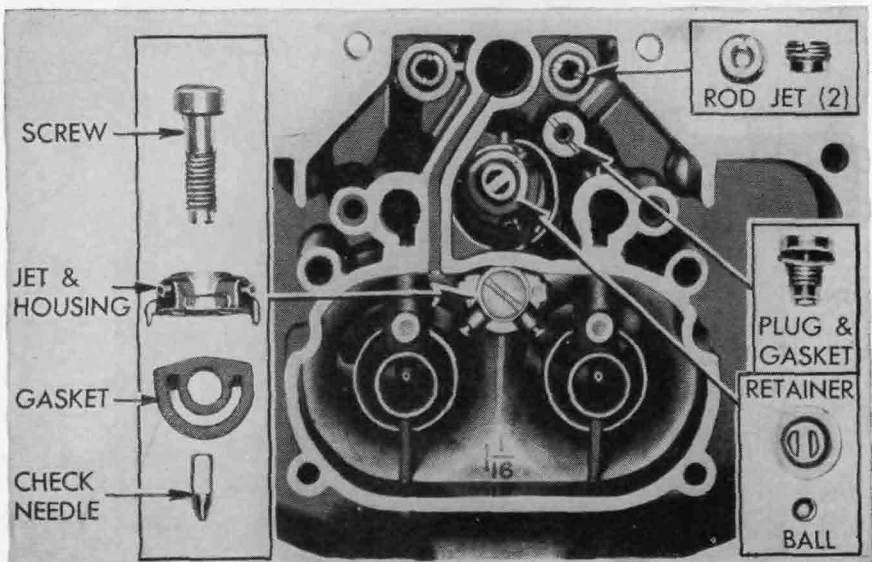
Location of jets, housing, and other parts in main body. (Buick Motor Division of General Motors Corporation)
